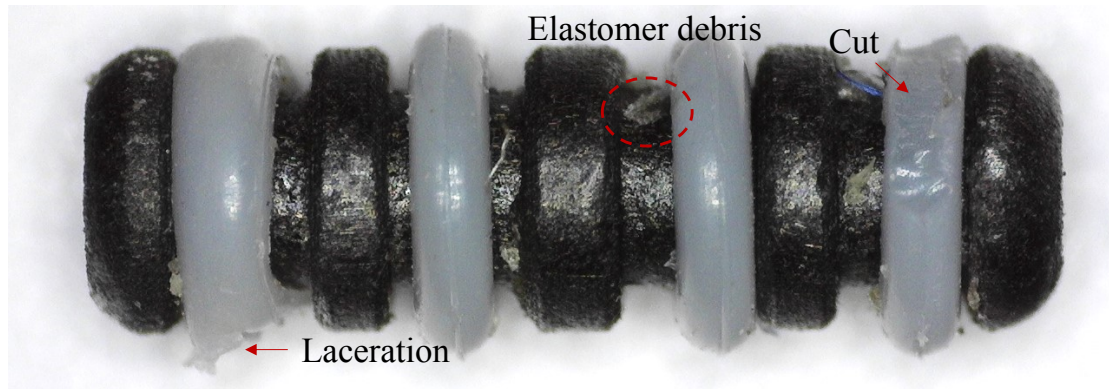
Example of a deteriorated micro O-ring. Example of a deteriorated micro O-ring after being extracted from the re-machined NPJ (S2) samples. Typically, deterioration, laceration or cut of the O-rings, occurred for the O-ring at the seal fitting extremities. Elastomer debris was also noticed. The micro O-ring in the picture is the 73172; its dimension is in Table 5.1.
